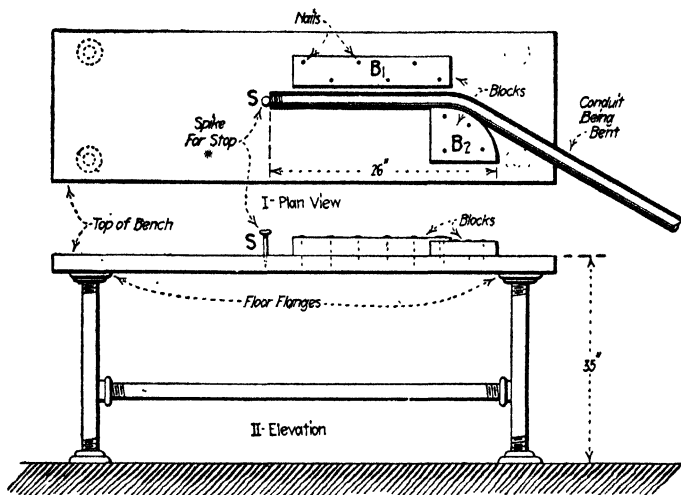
Form for bending conduit to exact contour arranged on bench top.
